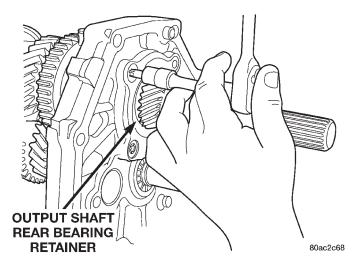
Remove Output Shaft Rear Bearing Retainer
